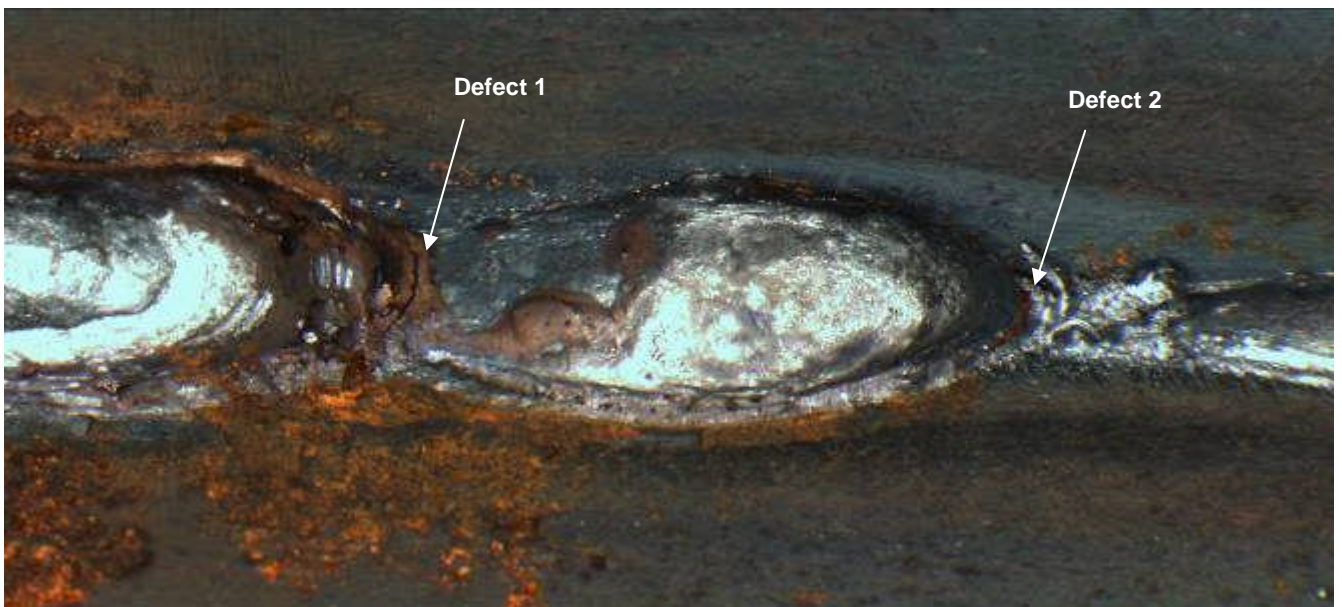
Internal View of Weld Close to Crack (Arm No.9)
